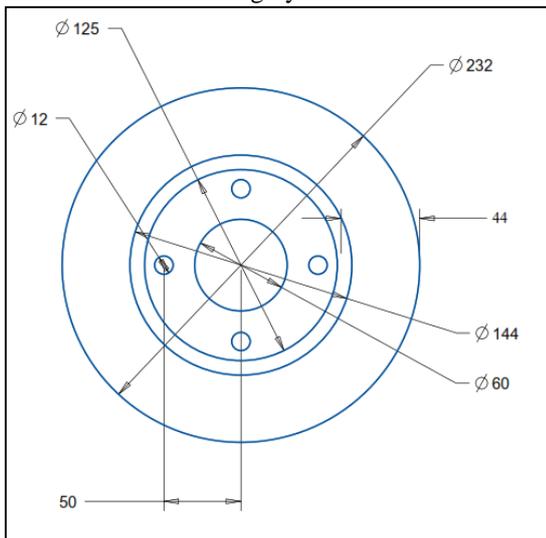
2D drawing of disk brake rotor in Creo 4.0
